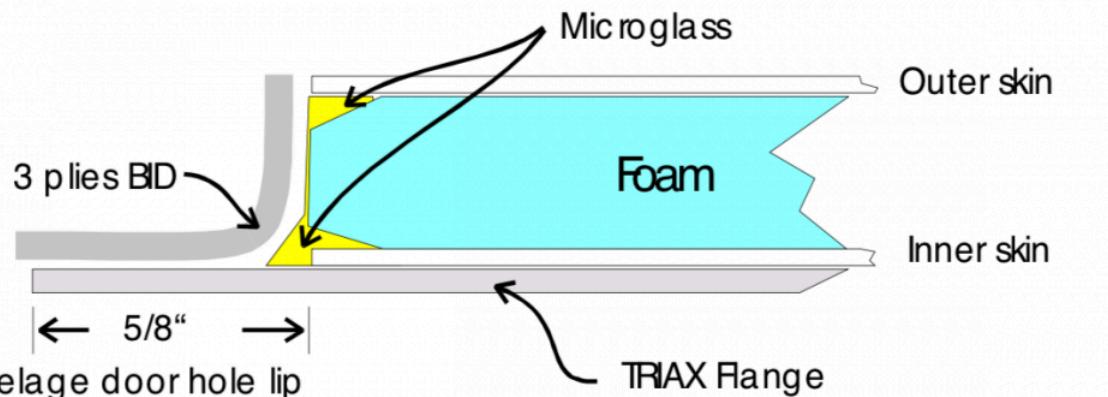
Fuselage Door Hole Detail Cross-Section
